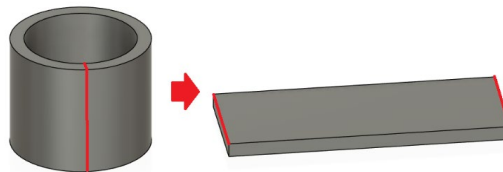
Slicing and transforming a cylinder into a plane.
